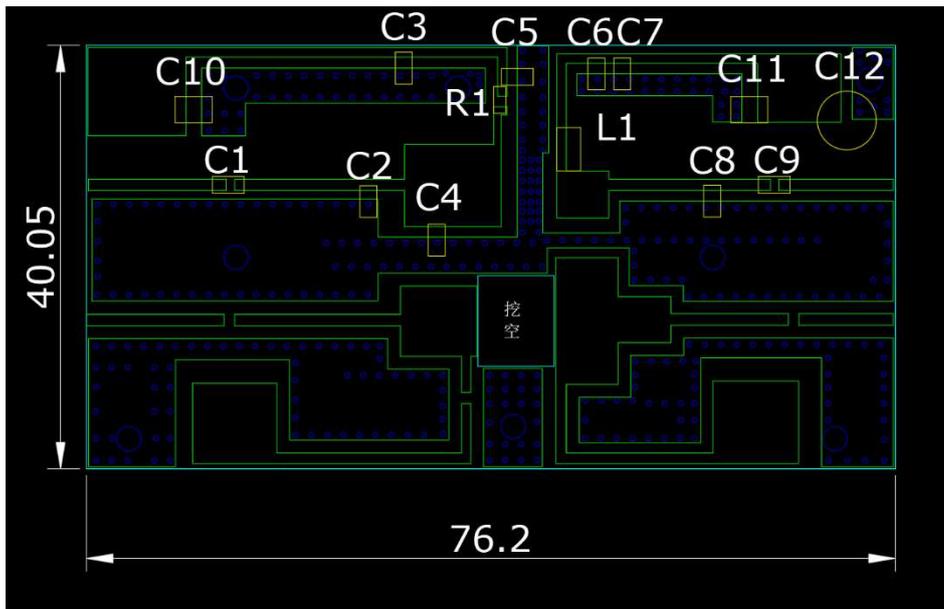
Test Circuit Component Layout (PCB Roger 4350B 20Mil, PCB file upon request)
